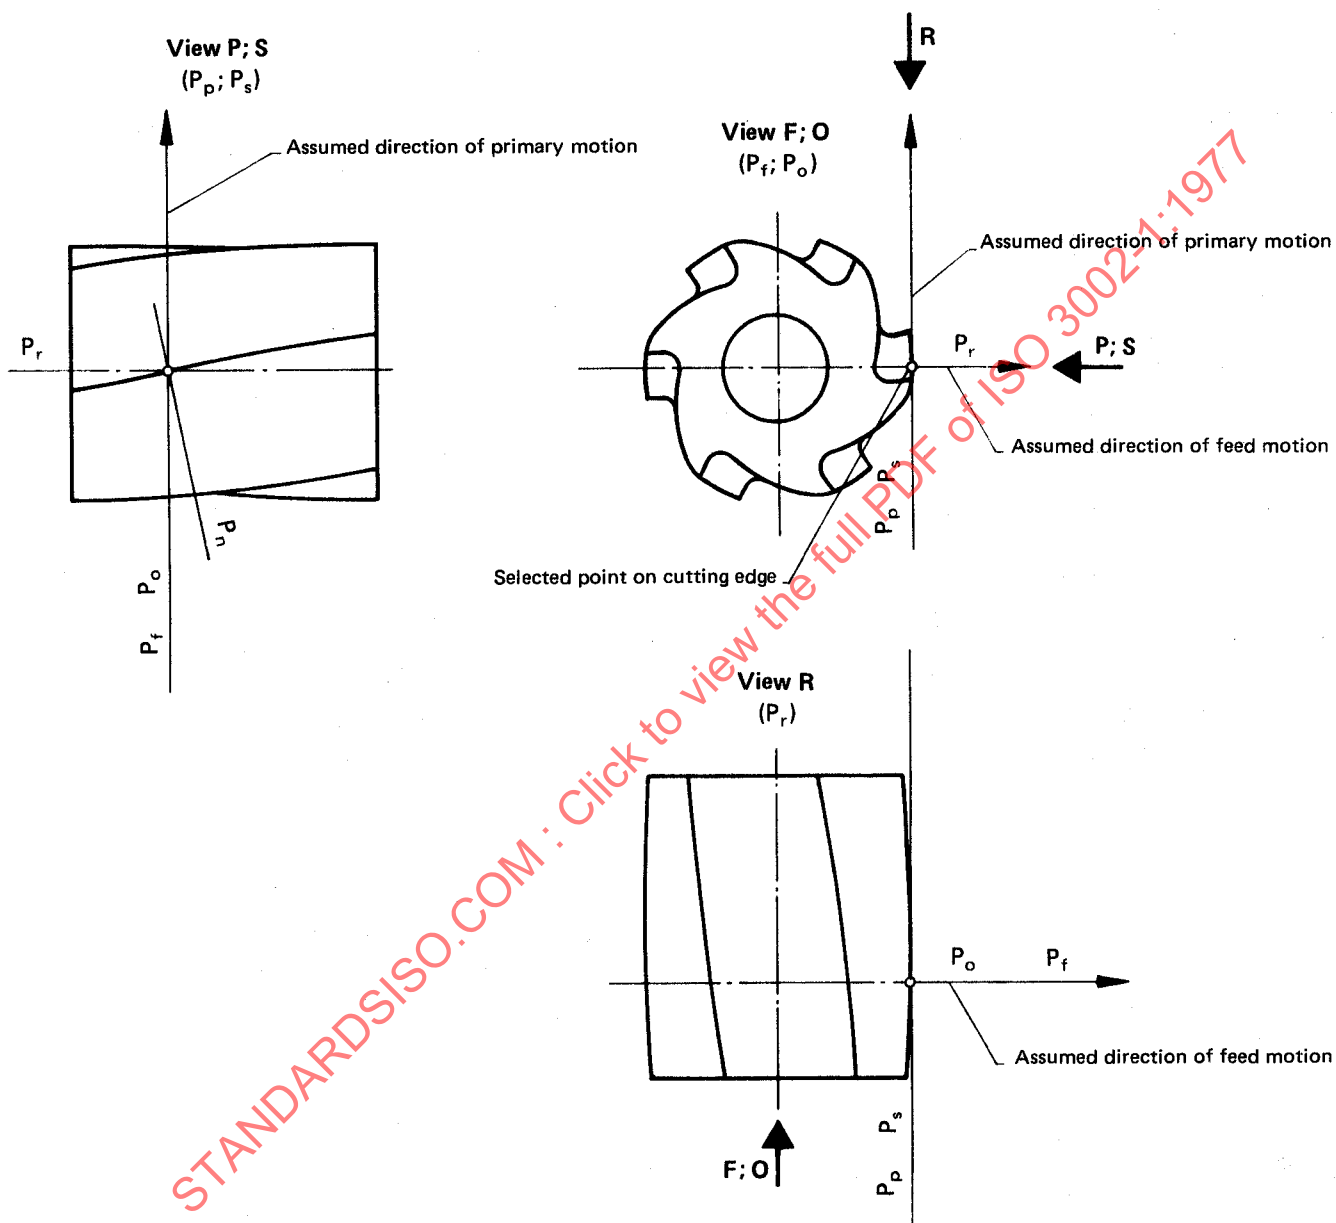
Planes in the tool-in-hand system — Slab milling cutter
